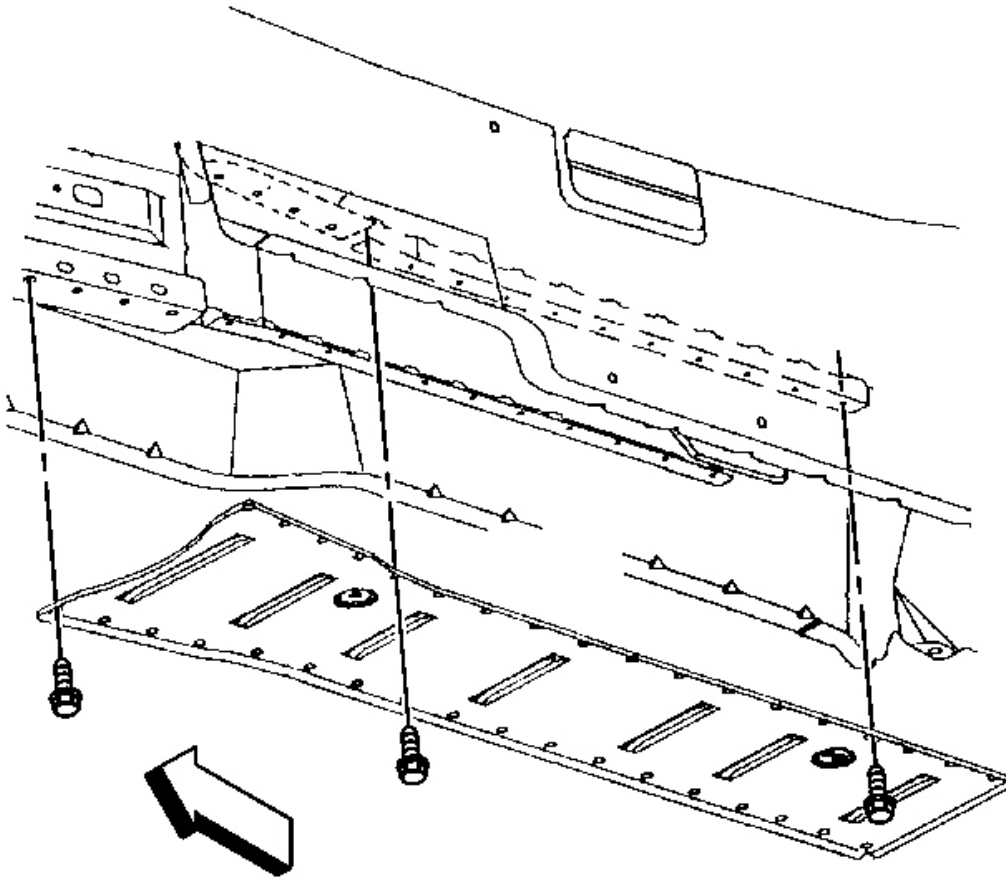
Driveline Tunnel Close-Out Panel & Bolts
